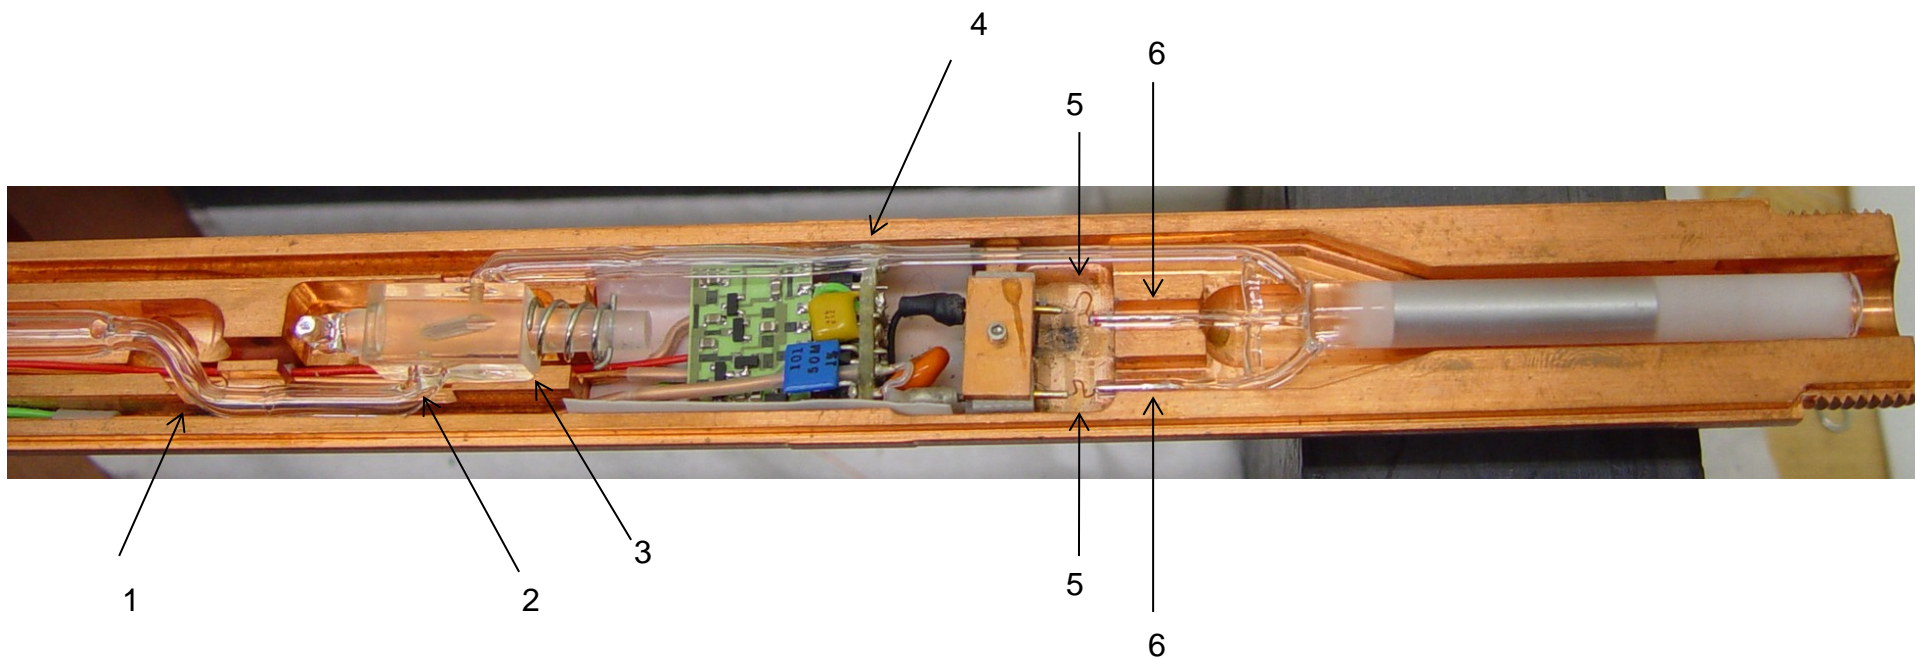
Final fit of the GPC to a cradle. The points identified are critical to the GPC fit within the cradle: 1 and 2 represent clearances for the gas inlet on the atmospheric side; 3 is the barrel edge clearance; 4 is the circuit board clearance; and, 5 is the length of the cathode and anode tubes. Note also, 5 points to the Cu leads that are “S-shaped” to provide additional wire if connector is broken off; and, 6 is the point within the tubes to their ends that is filled with Ga to weld the W wires to the Cu leads (5)
